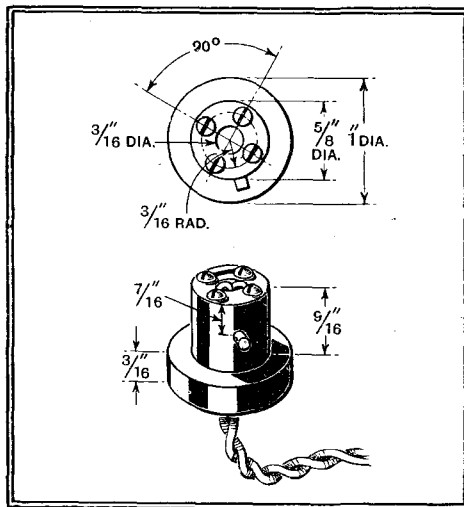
The plug and socket arrangements for making connection with the telephone earpiece.
